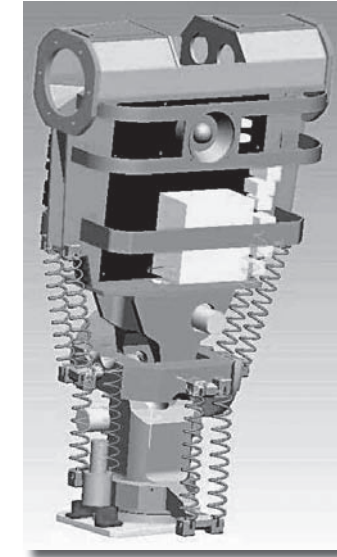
Engineering drawing of the upper body of the humanoid robot with integrated mainboards, loudspeaker and the 3DOF hip with supporting springs.
